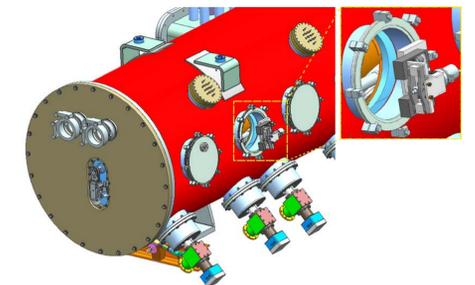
Actuating components assembled on a removable cartridge that can be removed from the cryomodule by dedicated access ports
